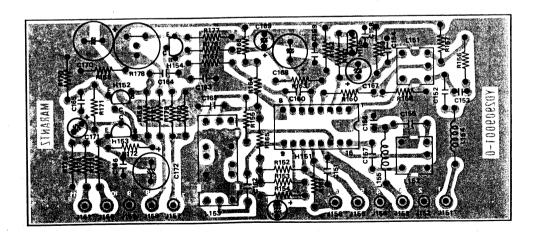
AM Tuner Unit Assembly P150 Component Locations
